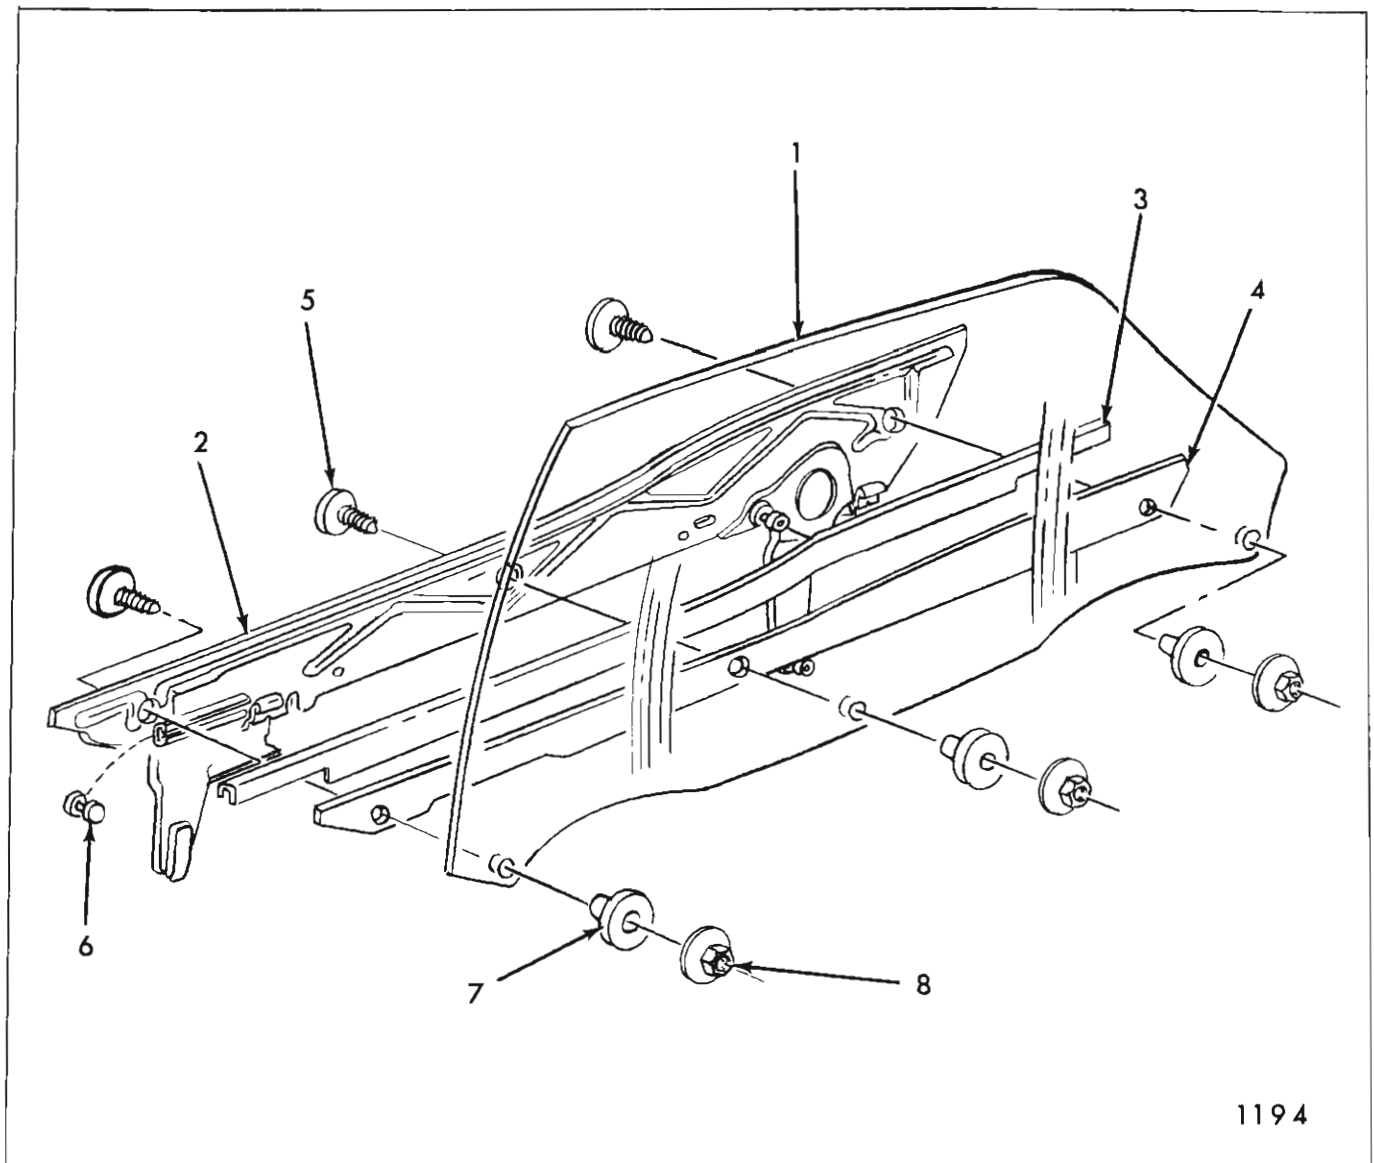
D60—Rear Door Window Assembly 38-48-68000 Series Except 68069
